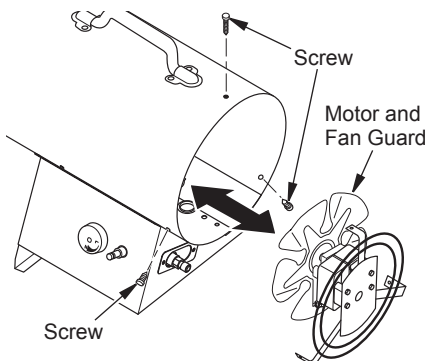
Removing/Replacing Motor and Fan Guard from Heater
